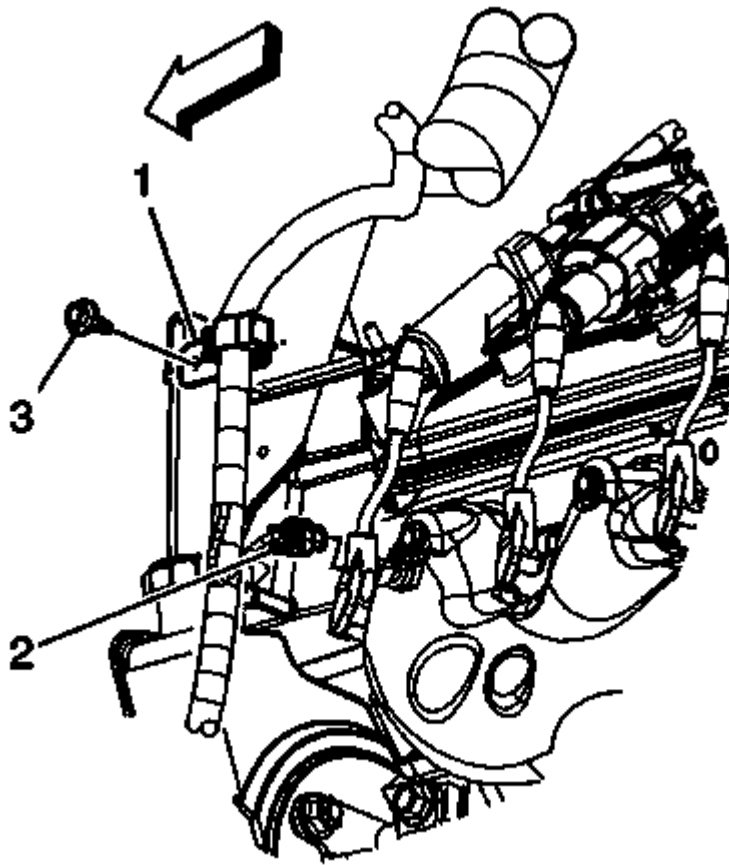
View Of EVAP Canister Purge Tube & Quick Connect Fitting
